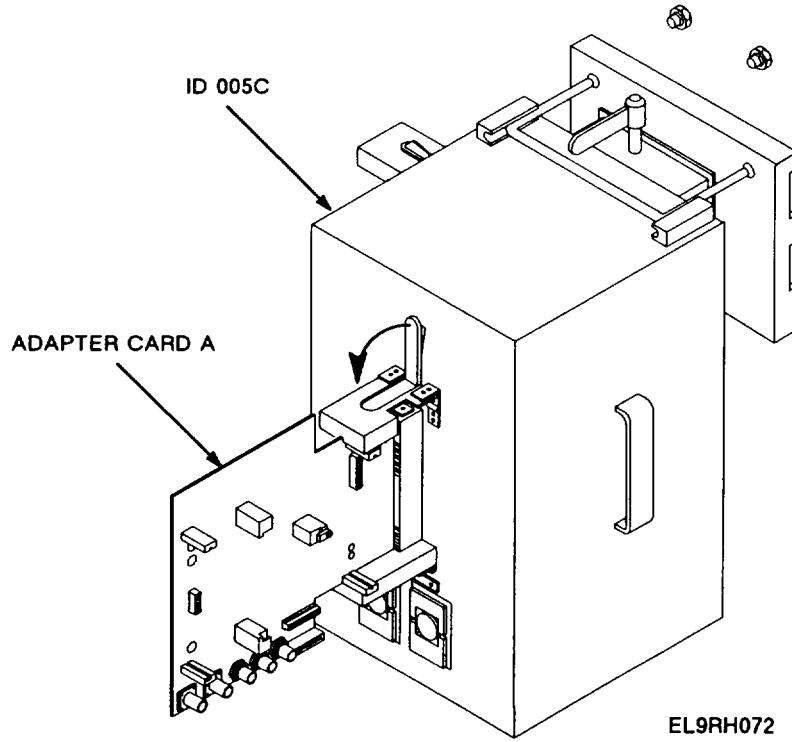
Installation of Adapter Card A for Synthesizer Alignment
